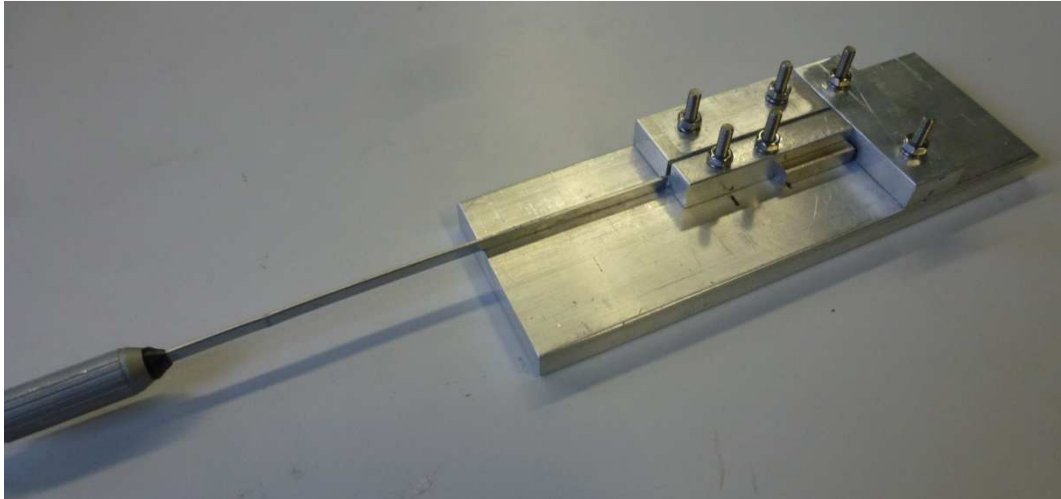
Assembled tool for magnetic uniformity quality control on single permanent magnets. The magnetic probe of the Sypris DG 610 gaussmeter and a CESM in measurement position are shown.
